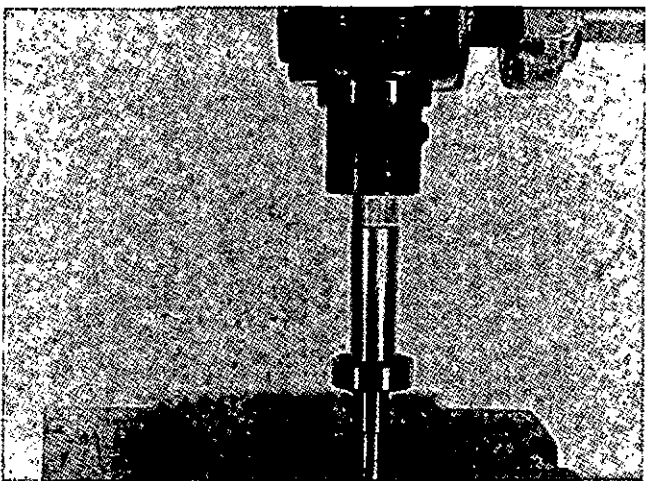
, (F541). Press the drive bearing on the shaft.
